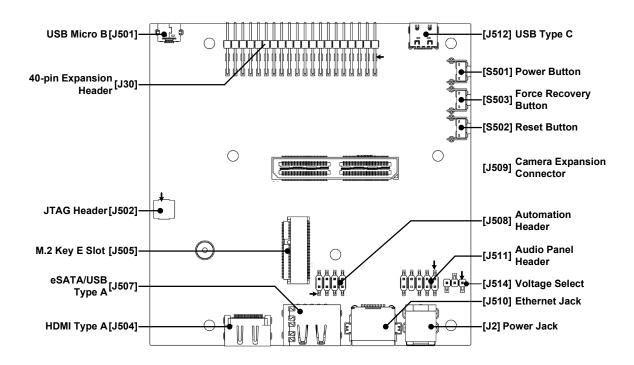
Jetson AGX Xavier Carrier Board Placement - Module Connector Side
